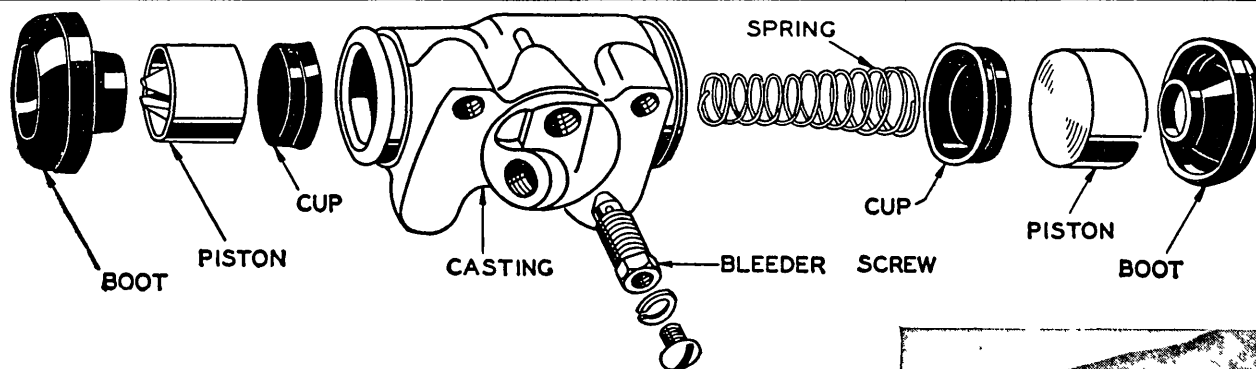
Exploded view of wheel cylinder with rubber end covers or boots
